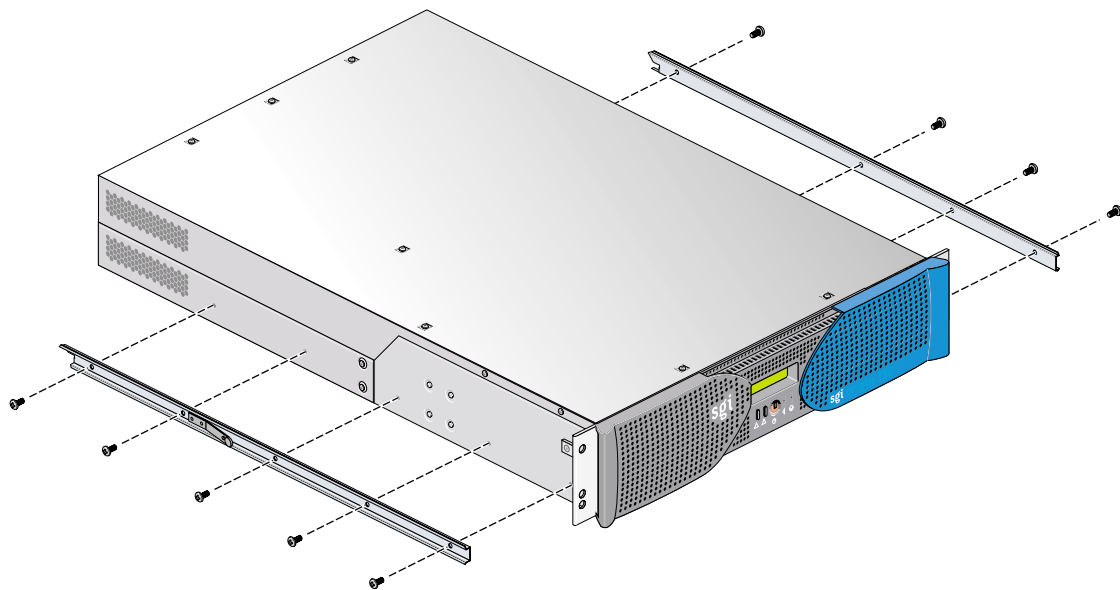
Attaching Chassis Rails to the Module Chassis
